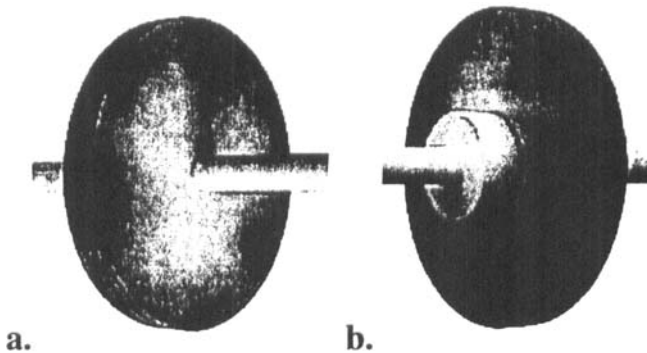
VIEW OF 'DESIGN A' DISK MOUNTED ON A STAINLESS STEEL ROD
